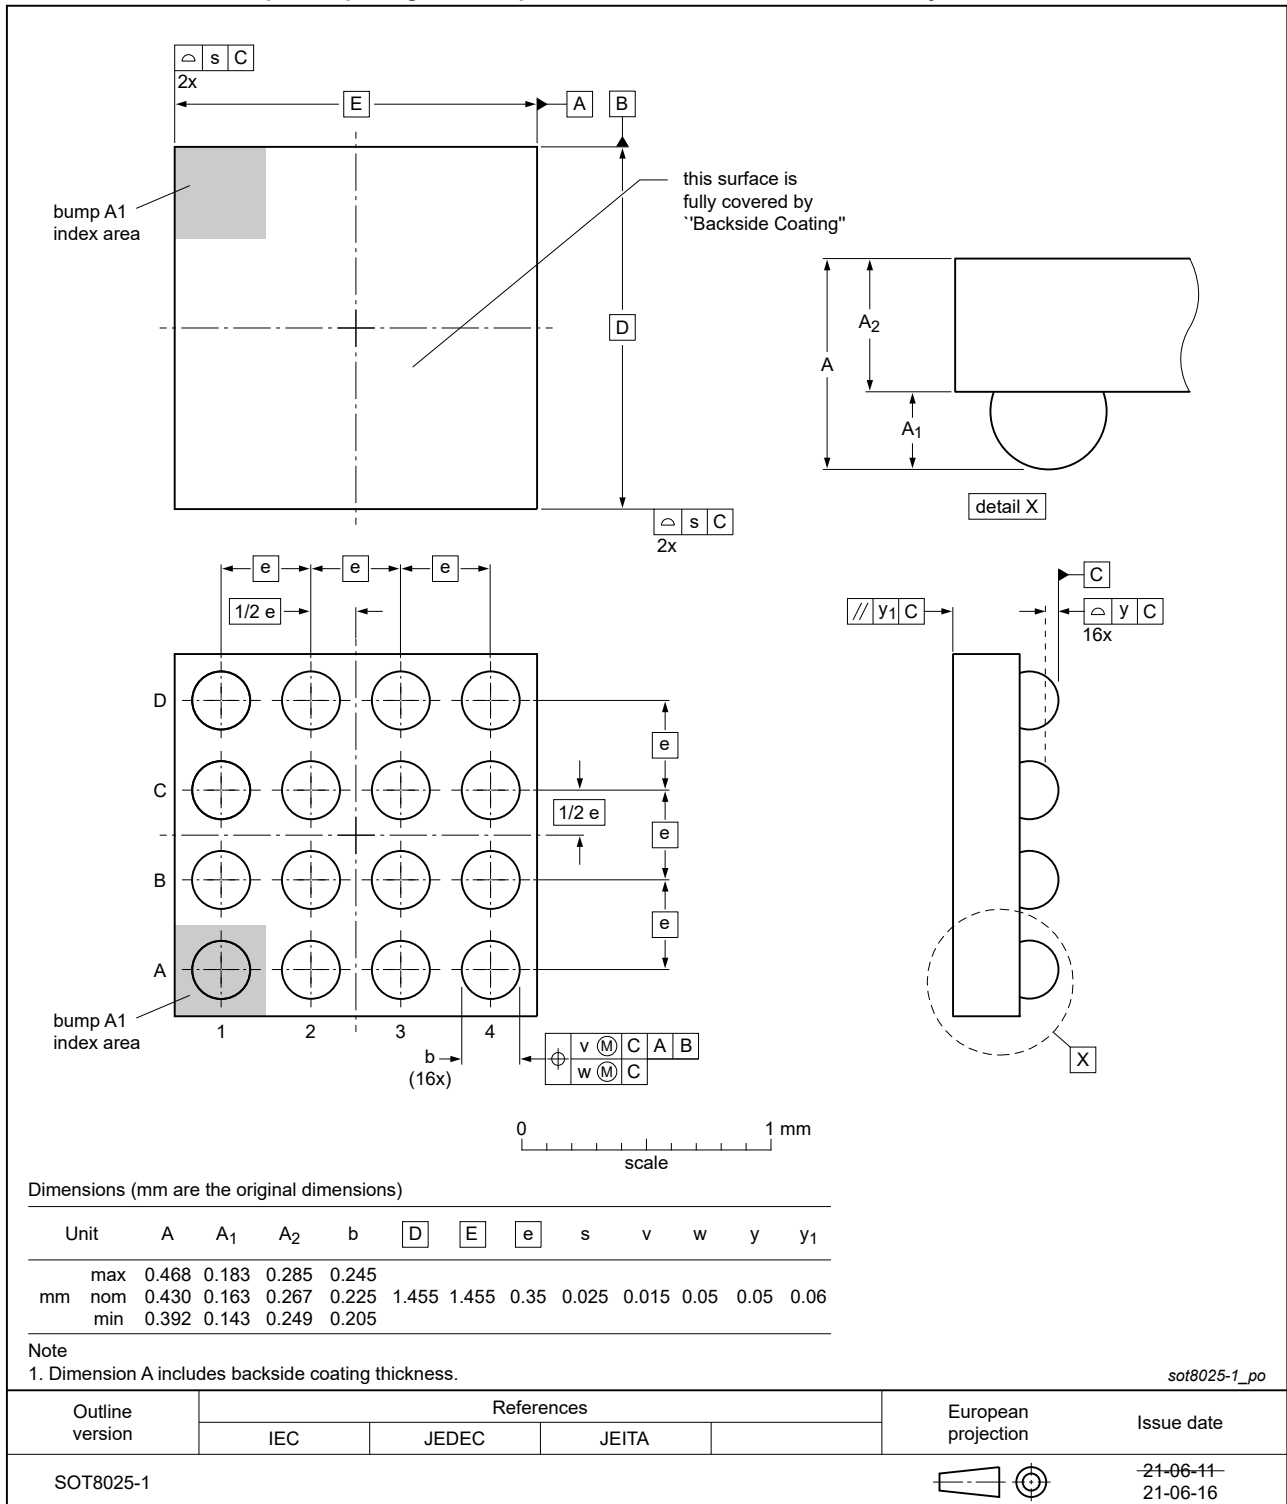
Package outline SOT8025-1 (WLCSP16)
